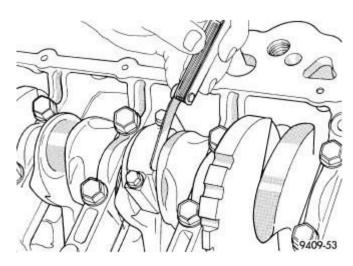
Connecting Rod Side Clearance Courtesy of CHRYSLER GROUP, LLC
